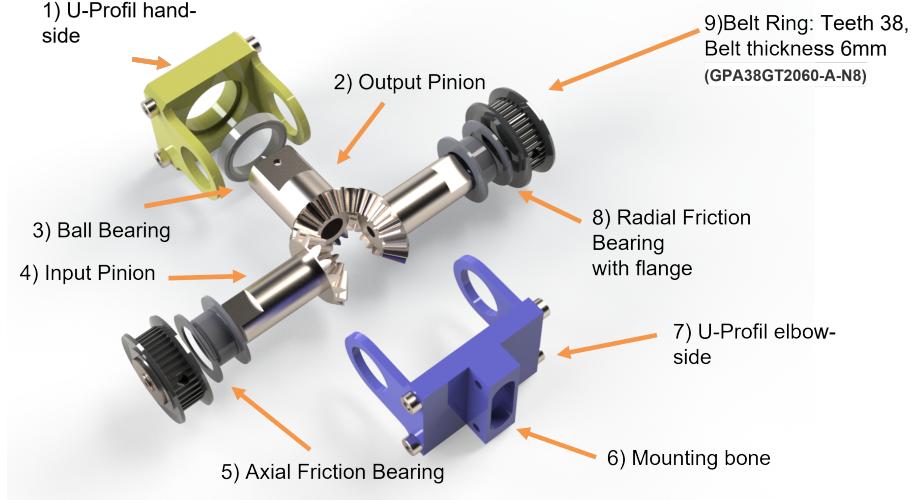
Exploding view of the updated differential wrist mechanism. All functionalities as well as dimensions stayed the same. However, instead of two ball bearings, the new design uses one friction bearing.
